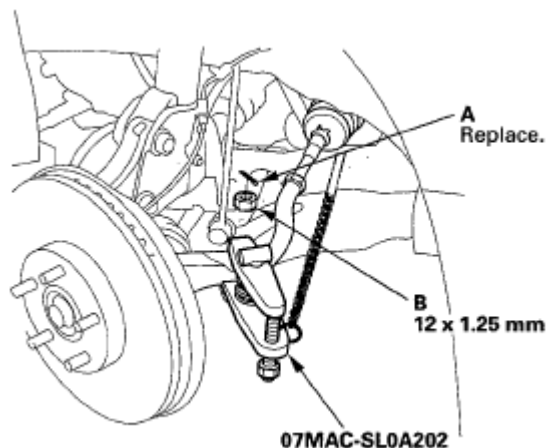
Identifying Tie-Rod Ball Joints And Knuckles
